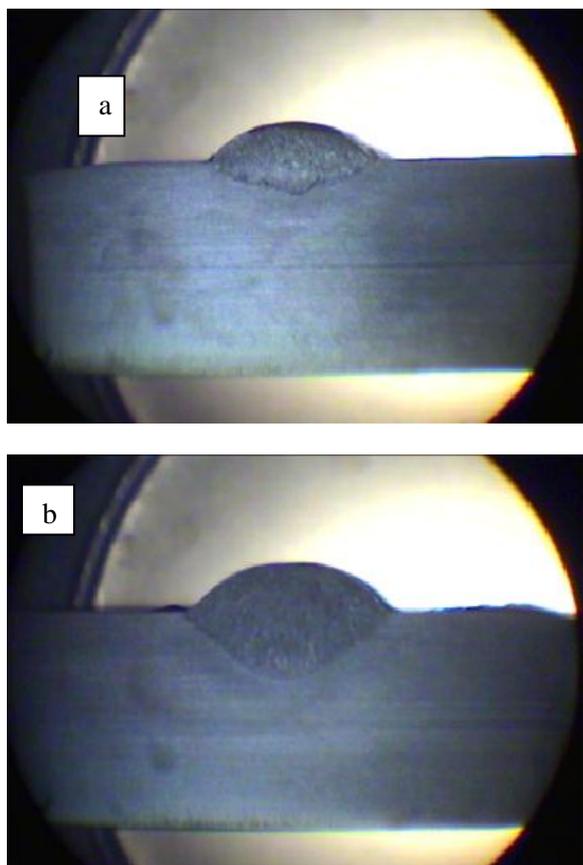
Penetration of bead on plate weld (a) conventional GTAW (b) AA-GTAW
